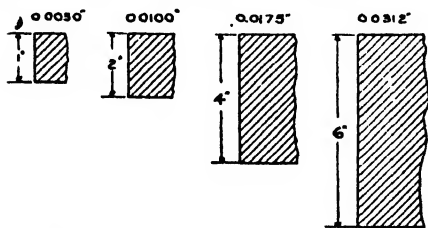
Cross cut tolerances, precision machine cutting practices.
